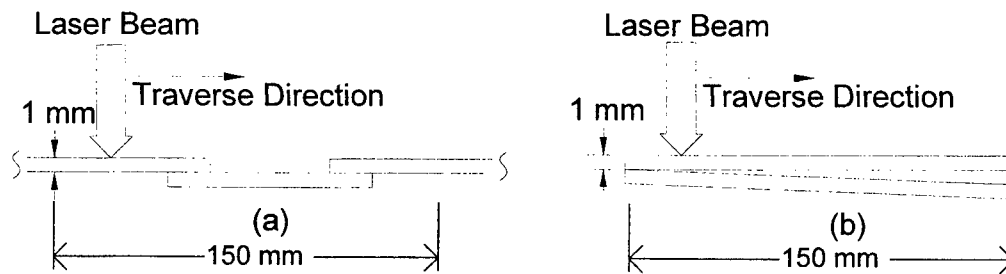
(a) Mild steel stepped work-piece, (b) lap-weld with gap.
